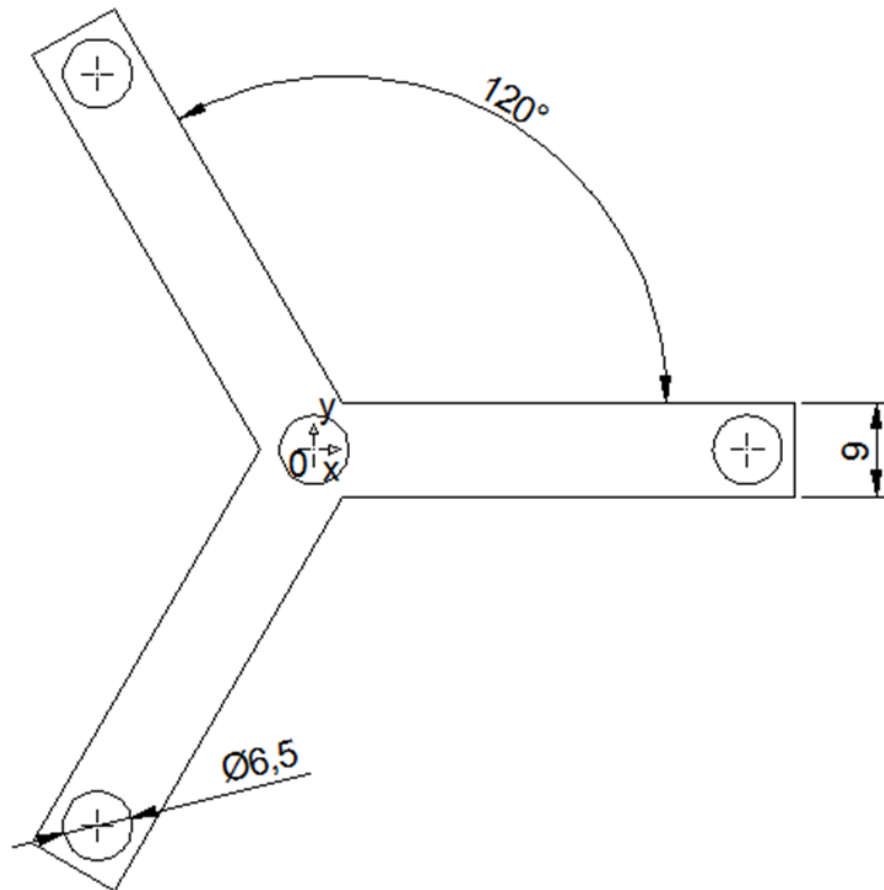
CSC hull dimensions, upper view, dimensions in meters [m]
